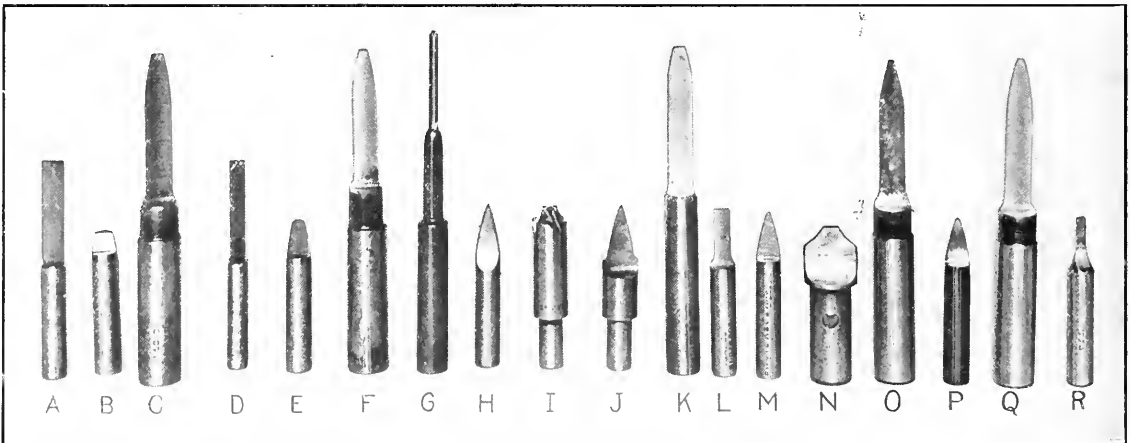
Type of Tools used for making the Dies for producing Spitzer Bullets, these Dies being used in the Machine shown in Fig. 6
